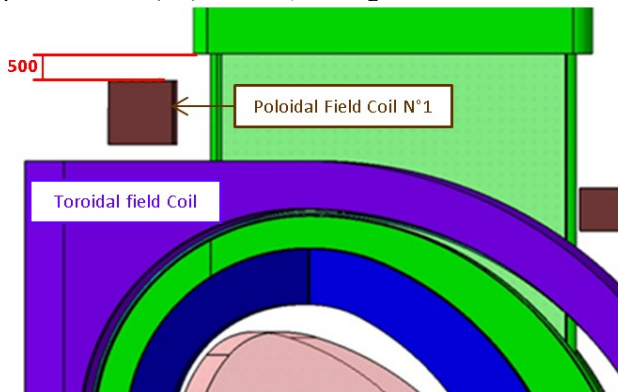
UP flange above the top surface of PF1 - dimensions are in "mm"
